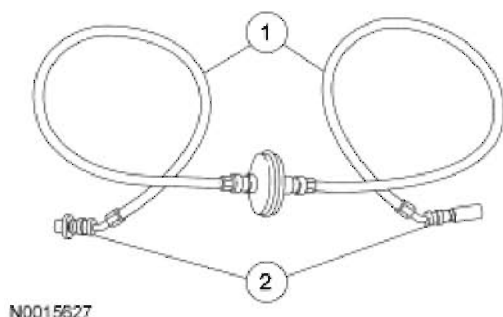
Identifying A/C Condenser Core Filter Inlet
